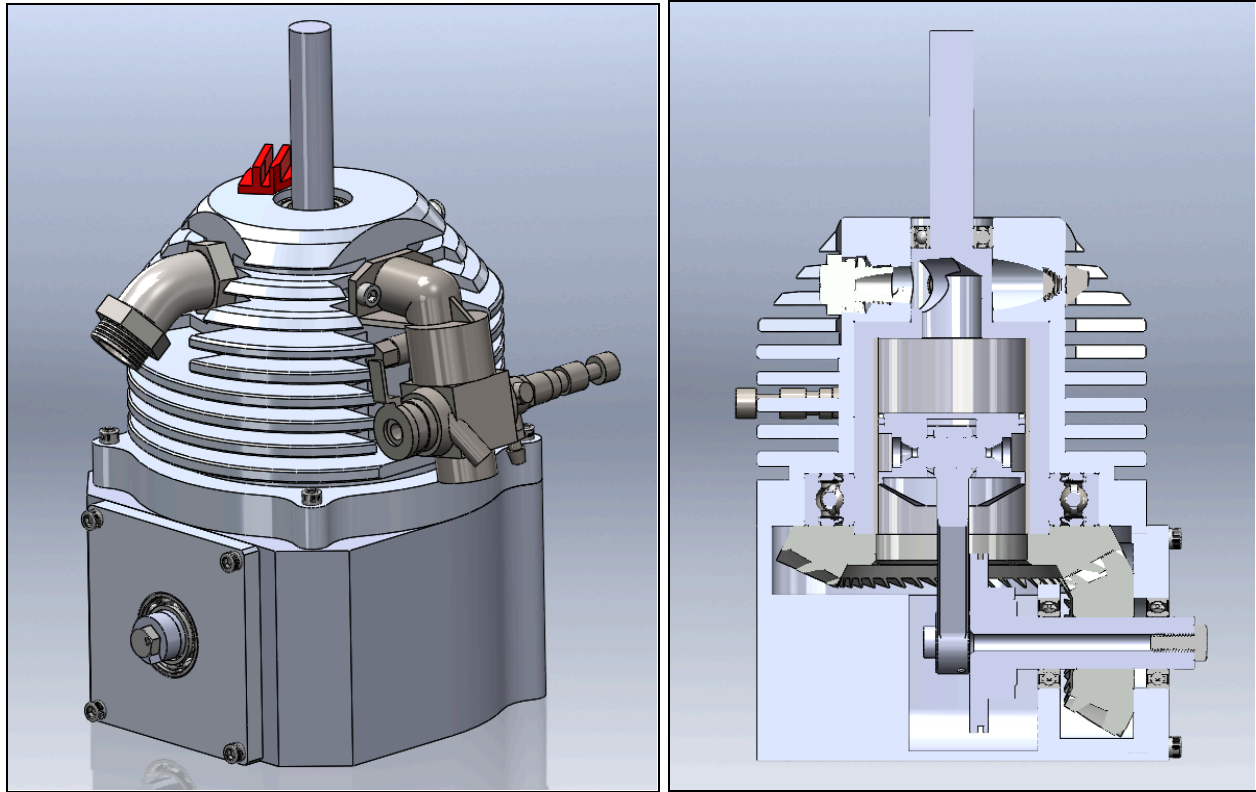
Full engine assembly (left) and full engine cross-section view (right).
